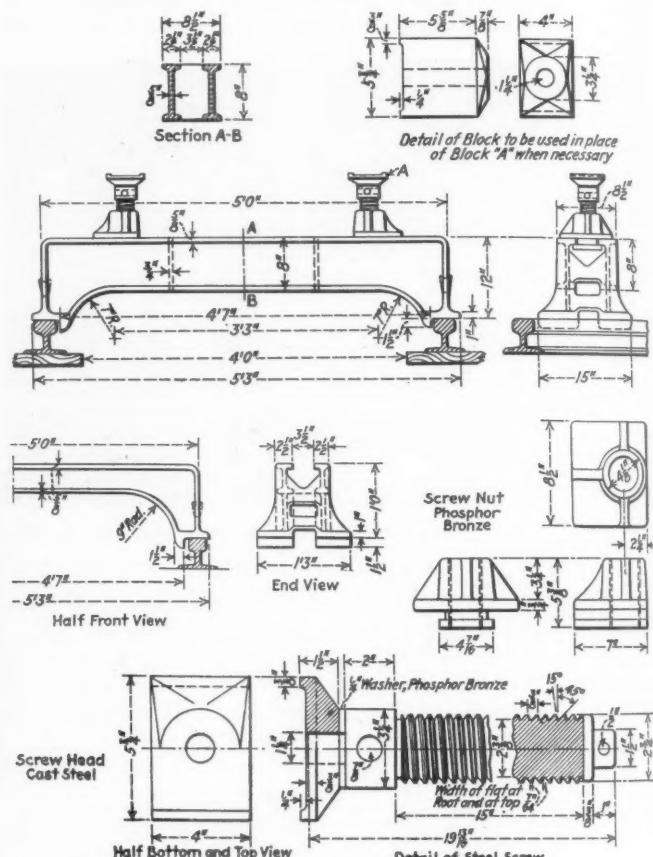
Assembly and Details of a Convenient and Rugged Erecting Pit Jack
